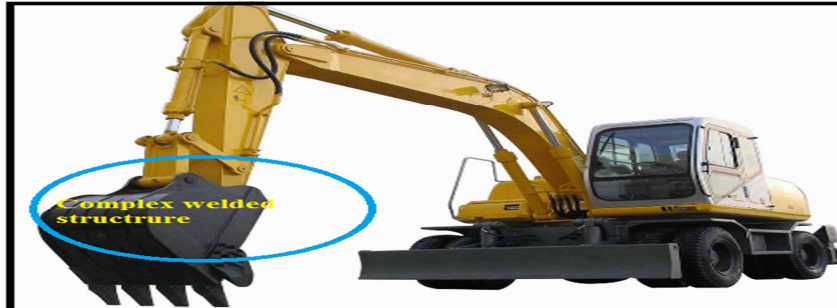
Examples of complex welded structure in excavator
